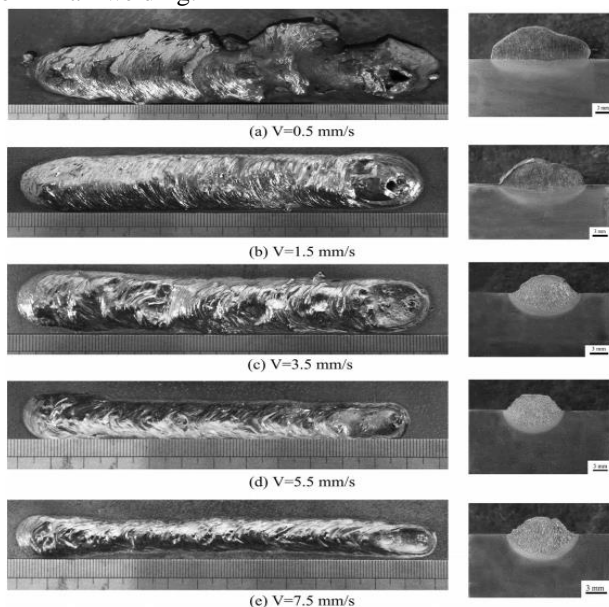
Weld appearance and cross section at different welding velocities: (a) V= 0.5 mm/s, (b) V= 1.5 mm/s, (c) V= 3.5 mm/s, (d) V= 5.5 mm/s, (e) V= 7.5 mm/s.[4]
